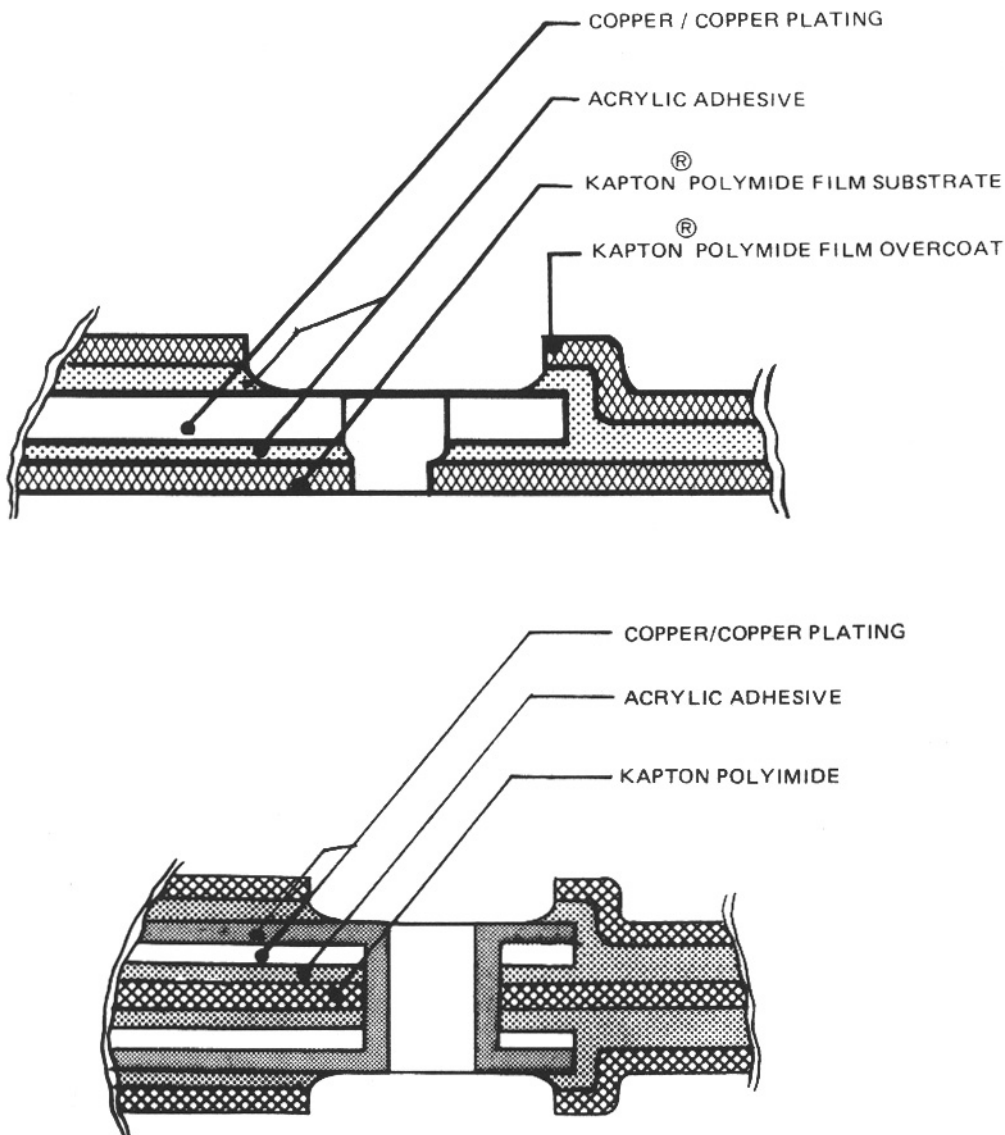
Cross section of flexible PWB: Top: Single layer conductor foil, bottom: Double layer conductors with through hole plating.
